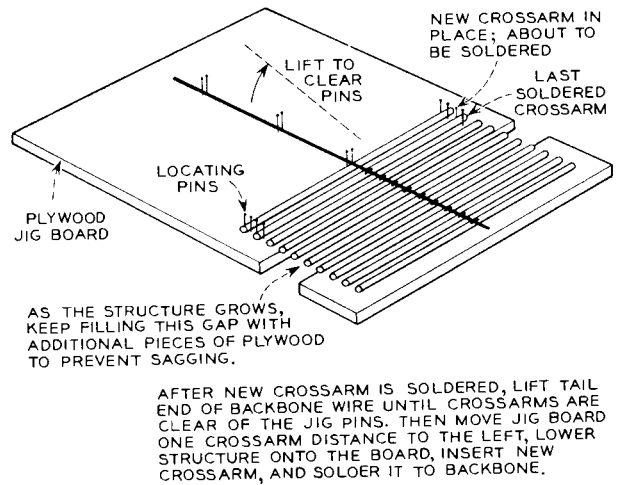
Use of a jig will help you to do an even job of soldering the crossarms onto the backbone.
